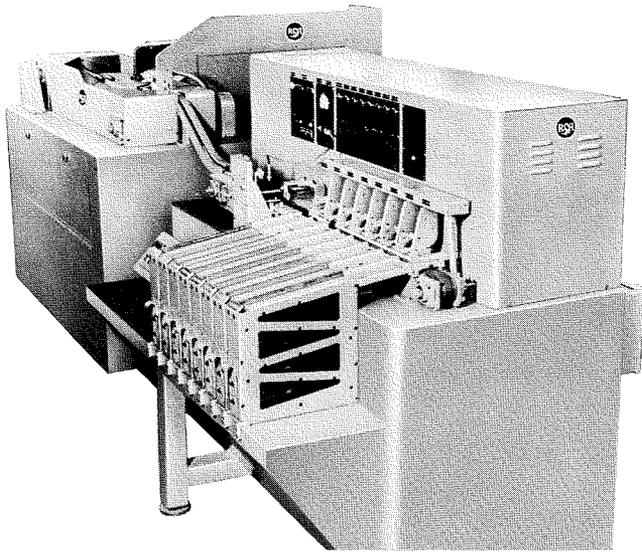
RCA Piston-Pin Inspection Machines such as this one are now being used in Ford, Chevrolet, and Oldsmobile plants. These machines inspect and sort the pins into 8 OD classifications in increments of 0.000.05 inch. They also check and segregate the parts for length and true roundness. Rate is 3000 per hour. An RCA Non-Mar Feeder-Orienter is at left.
